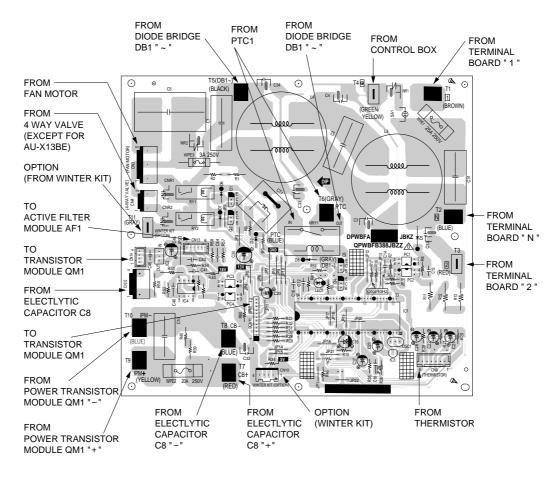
Printed Wiring Board for AU-X13BE and AE-X13BE
